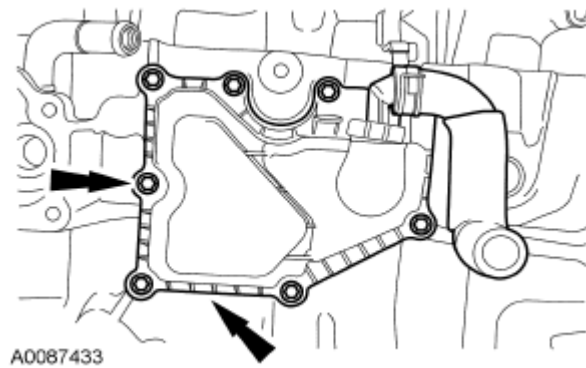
Locating Bolts & Crankcase Vent Oil Separator
